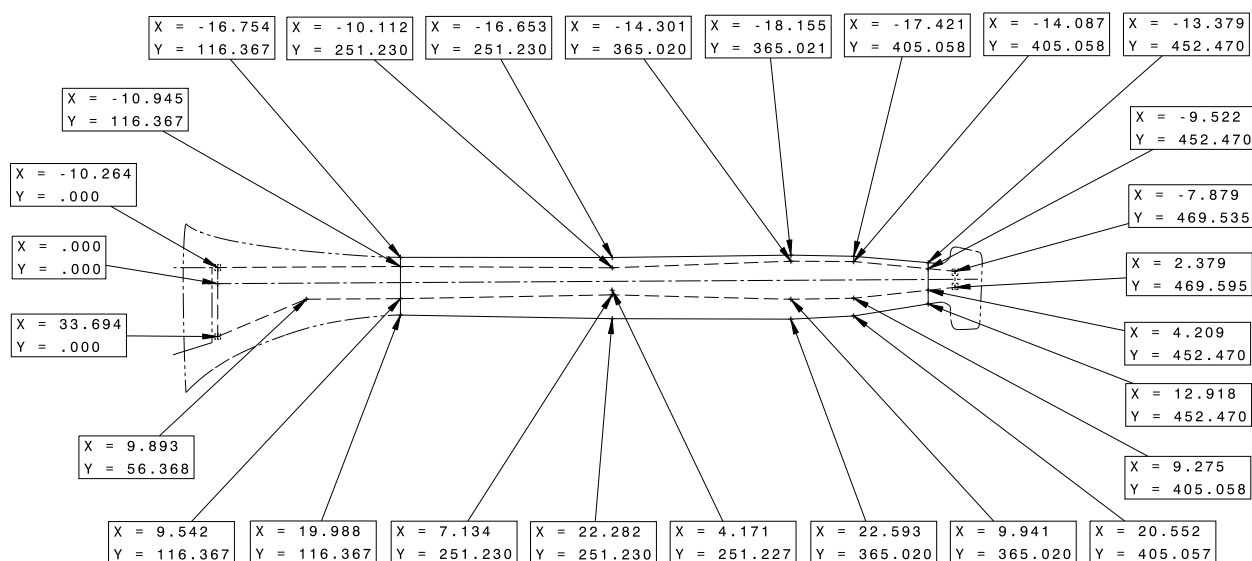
SUGAR High (765-095 Rev-J) strut corner points (units are inches).
